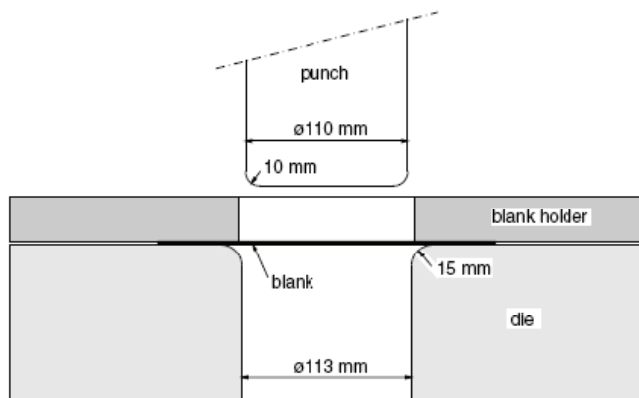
Dimensions of the tools for cylindrical cup deep drawing.
